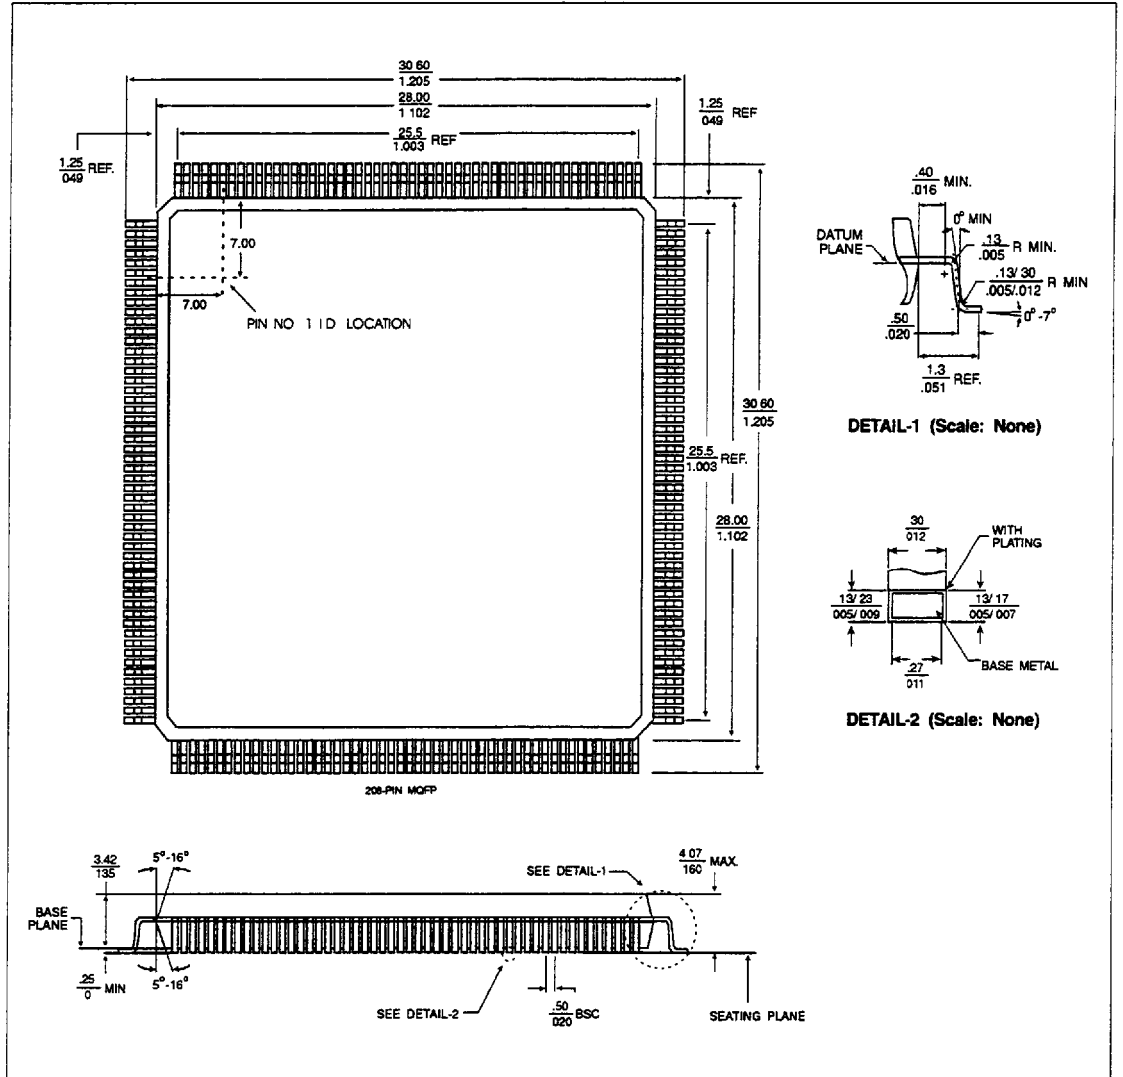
208-PIN MQFP PACKAGE DIMENSIONS
